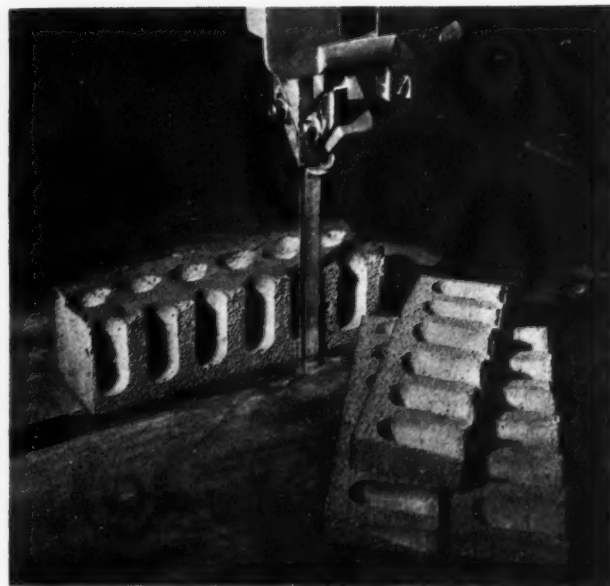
Cutting Sponge Rubber with a Band Saw Having a Tapered Cutting Edge
